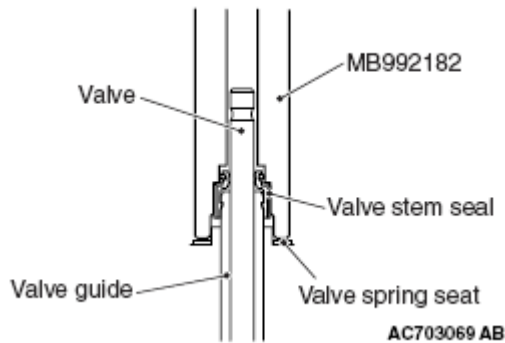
Filling Valve Stem Seal In Valve Guide Using Valve Stem Area As Guide
